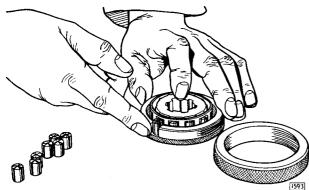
Assembly of the uni-directional clutch (Tool No. L.178).
